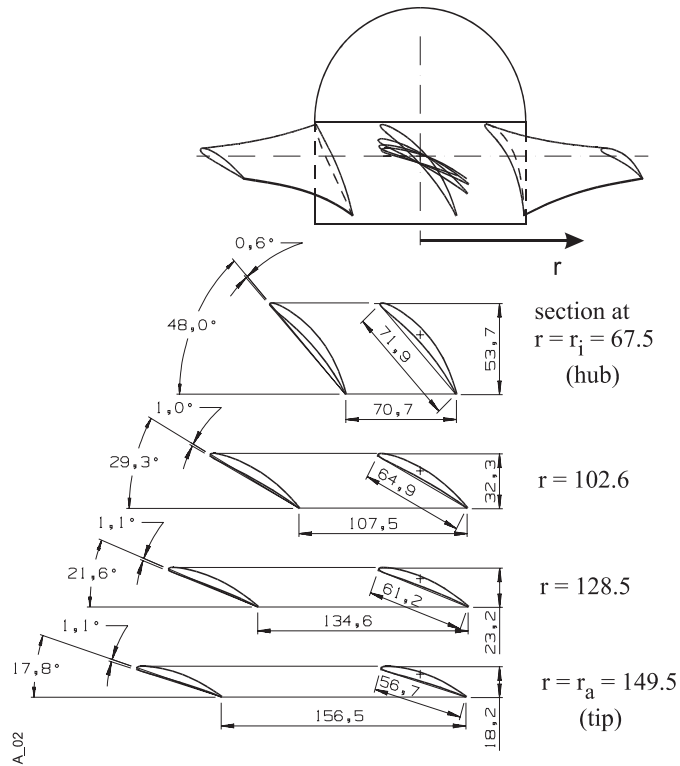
Impeller investigated (if not stated otherwise, dimensions in mm).
